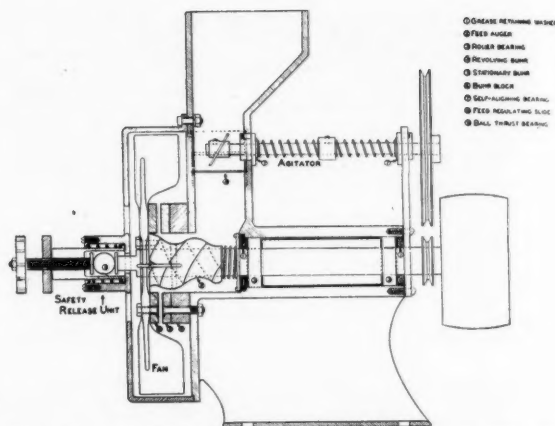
THE MILL DESIGN THAT HAS BEEN ONE OF THE OUTGROWTHS OF THE WISCONSIN STUDIES ON BURR MILL DESIGN AND PERFORMANCE
